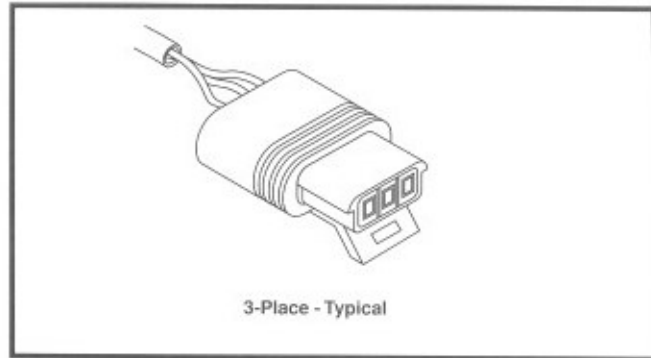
Packard Pull-to-Seat Terminal Connectors (Socket Sides)
